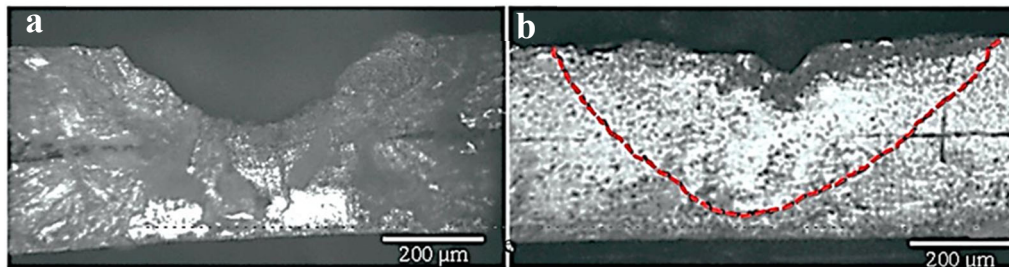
Cross-sections of the weld: a (sample 8); b (sample 4)
